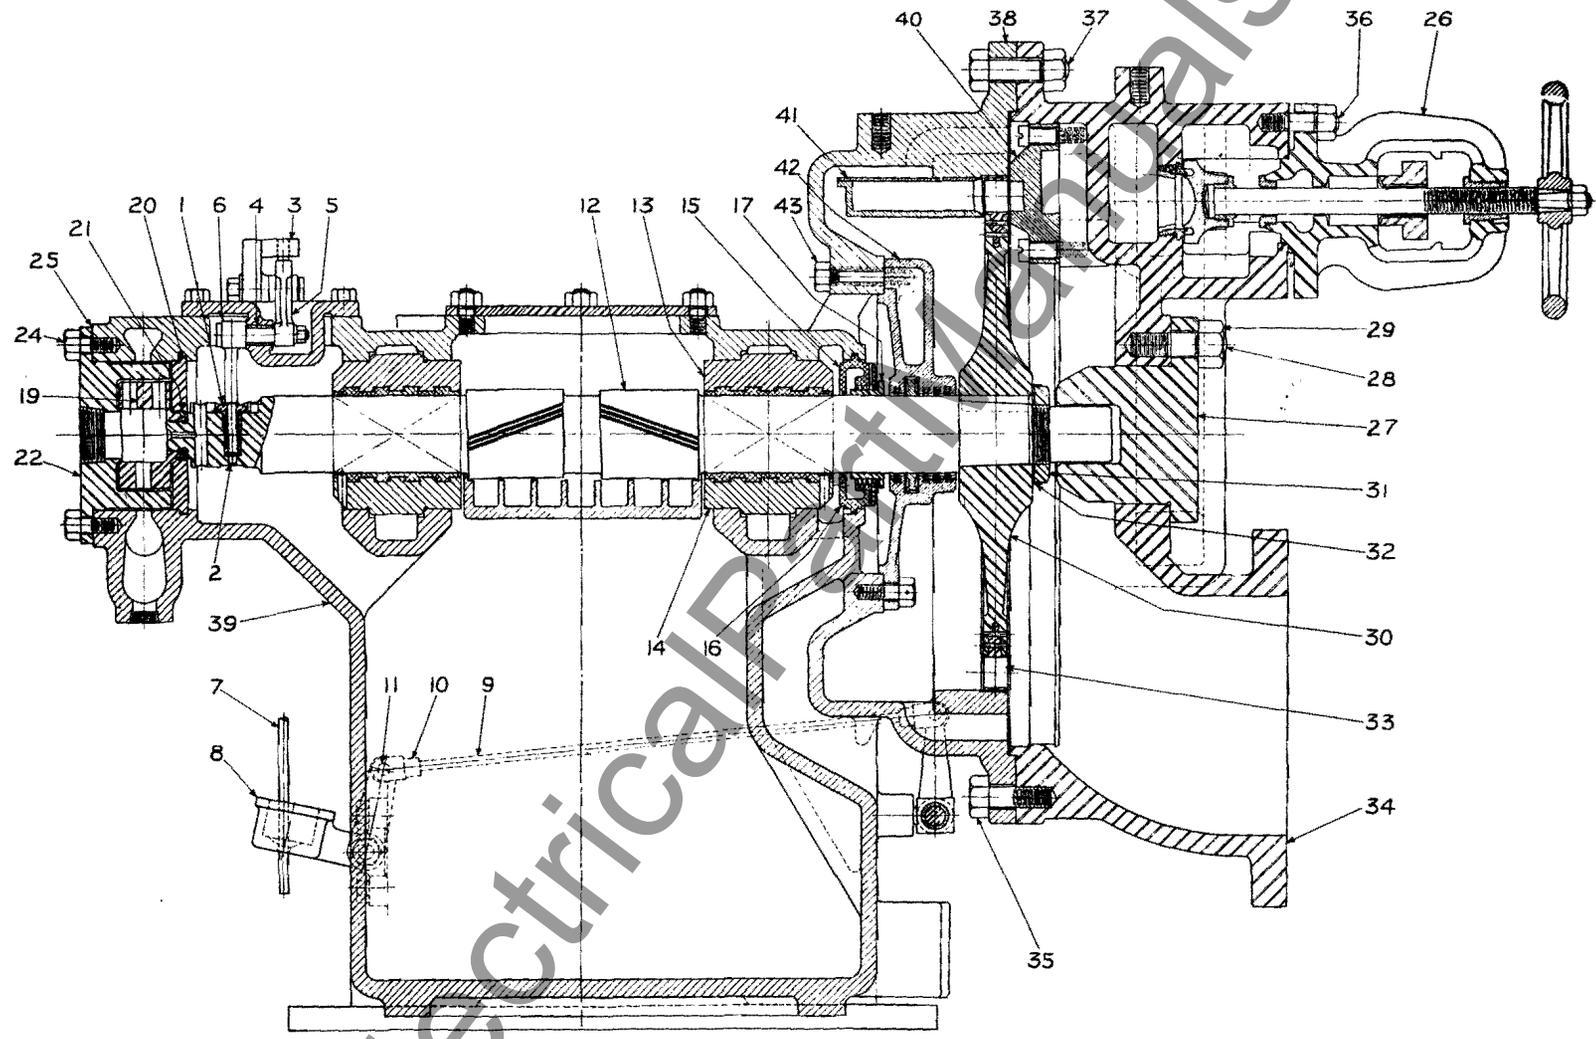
LONGITUDINAL SECTION OF TURBINE AND GEAR
